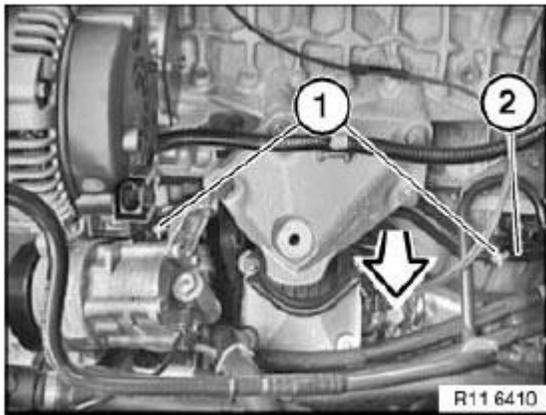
Removing Oil-Water Heat Exchanger With Hydraulic Lines
